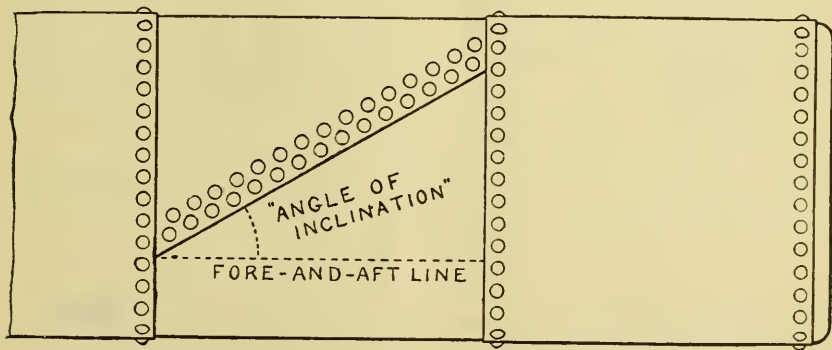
ILLUSTRATING THE DIAGONAL RIVETED JOINT.
